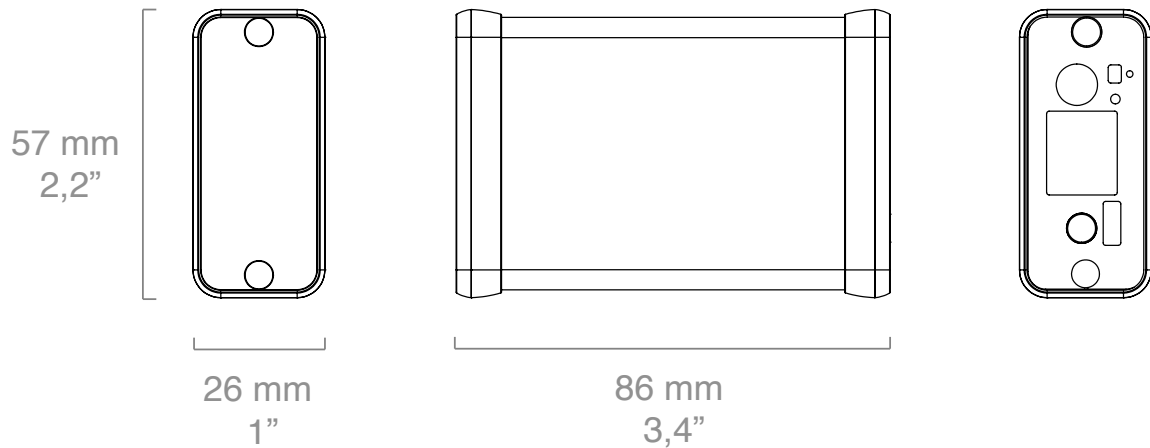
Technical drawing of TCP Link for ATEM with key dimensions and layout details.
